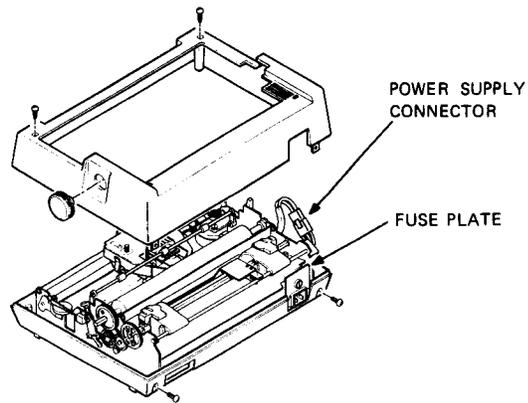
Printed Circuit Board Connector and Fuse Locations
